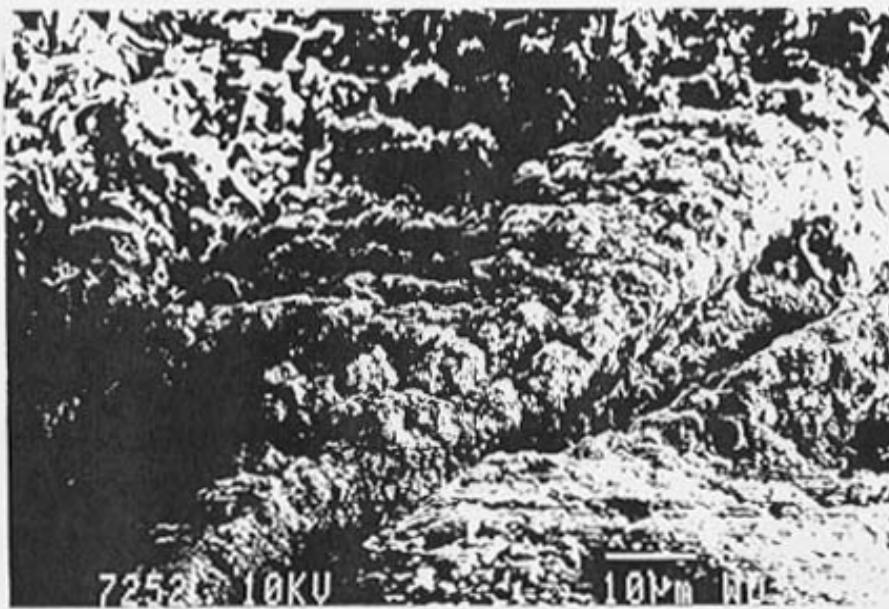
Inner starboard A3 hinge lug secondary fatigue crack striations
